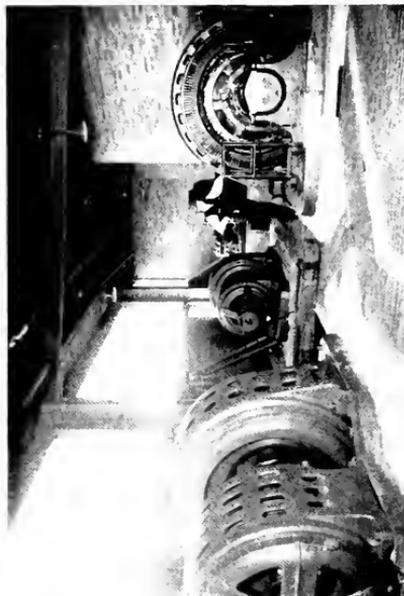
Motor Room in Rod Mill, Showing the 2160-h.p. Roughing Motor, the 1180-h.p. Finishing Motor and Their Respective Speed Regulating Sets
